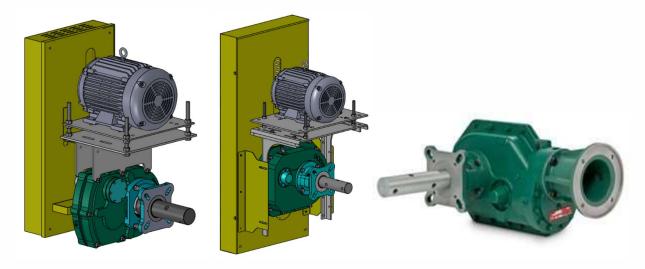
SCXT, TAII, and MTA Screw Conveyor Drives
